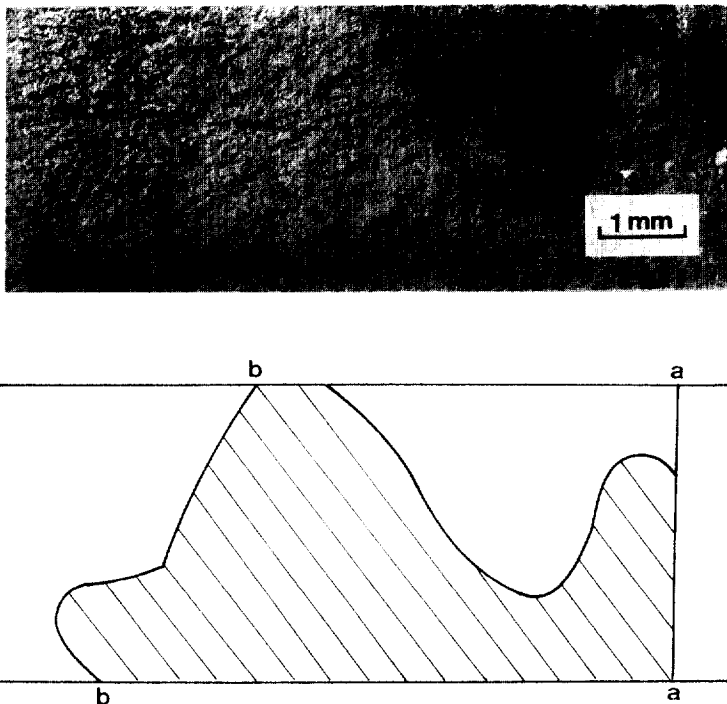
Fractograph of the fracture surface of the AISI 4130 specimen covered with epoxy resin modified with 1 μm silicon carbide.
